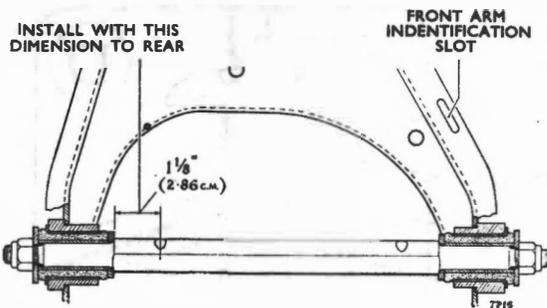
Sectional view of link bushes showing correct method of fitting fulcrum pin
